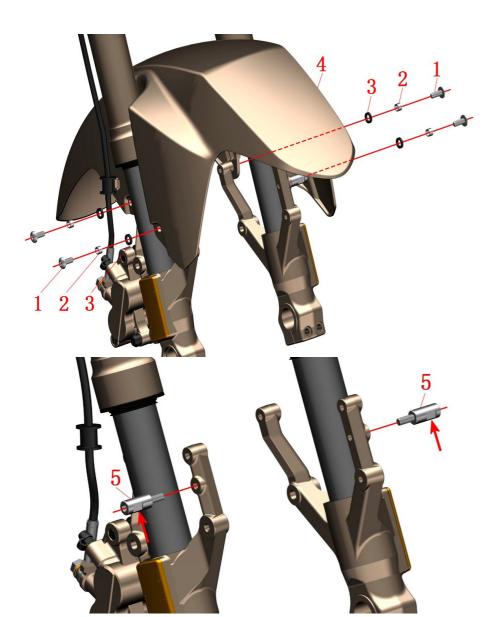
FRONT FORK COMPONENT		Front mudguard assembly	CHK	(0)
